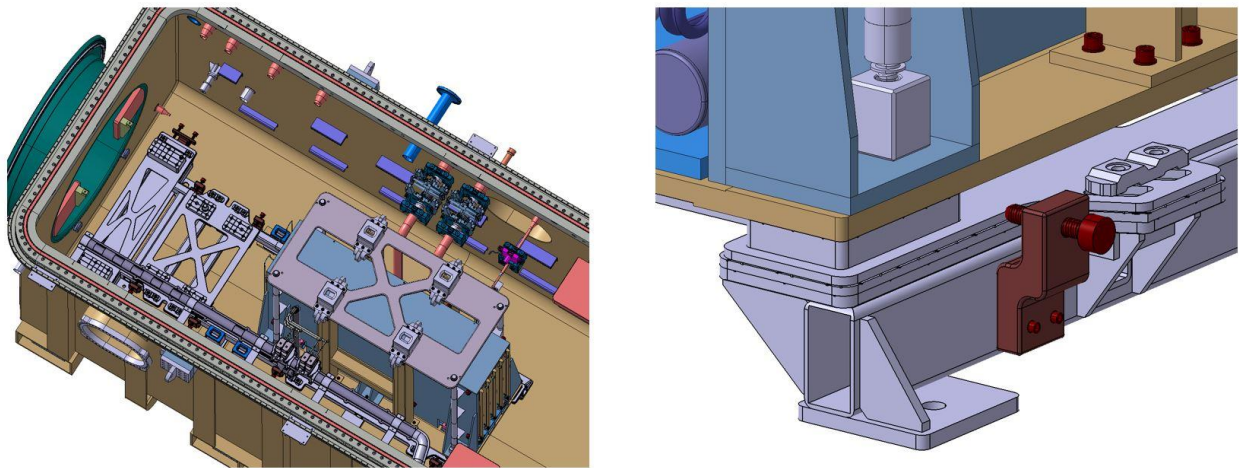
Assembly of NEU inside DNB Vessel and connection with alignment mechanism
